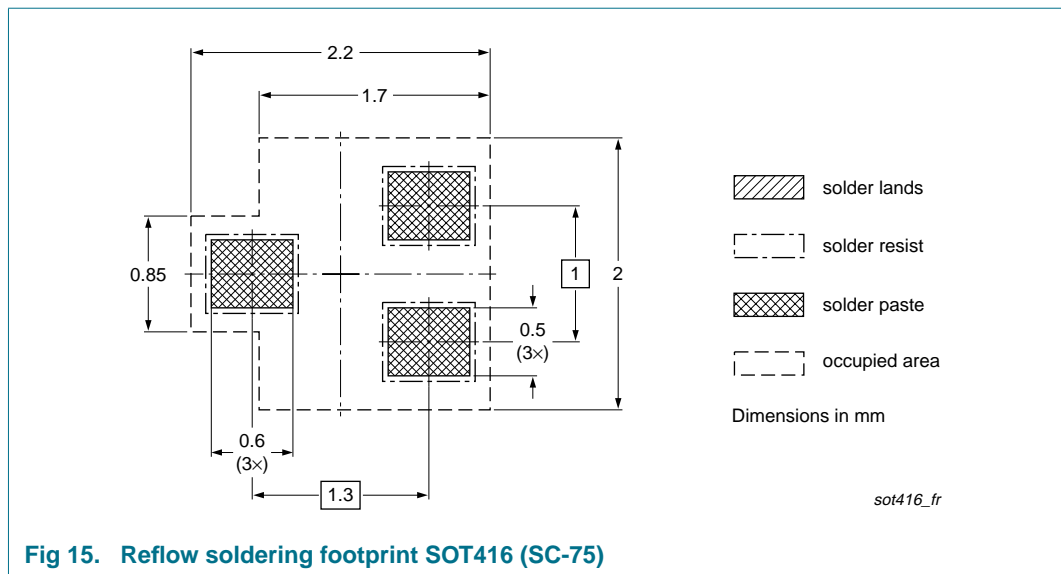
Reflow soldering footprint SOT416 (SC-75)
